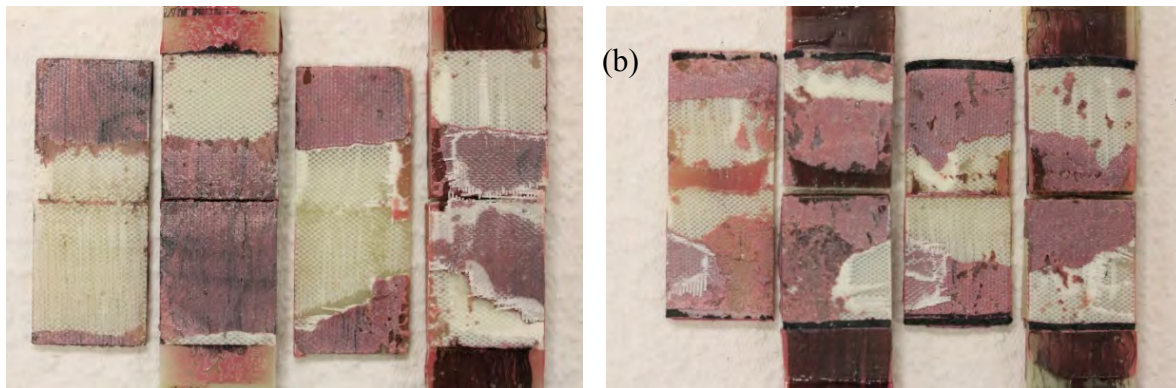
Fracture surfaces of “D” (a) and “E” (b) type joints specimens.
